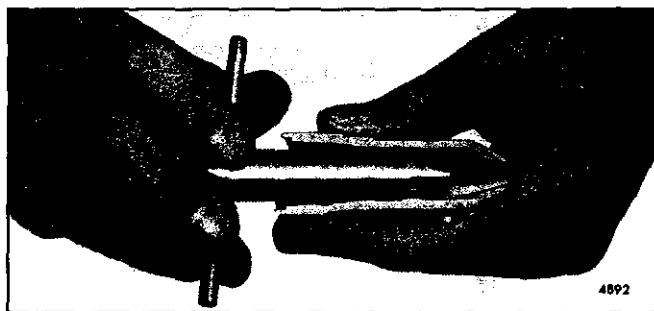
Cleaning Injector Nut Lower End with Tool J 9418-5
